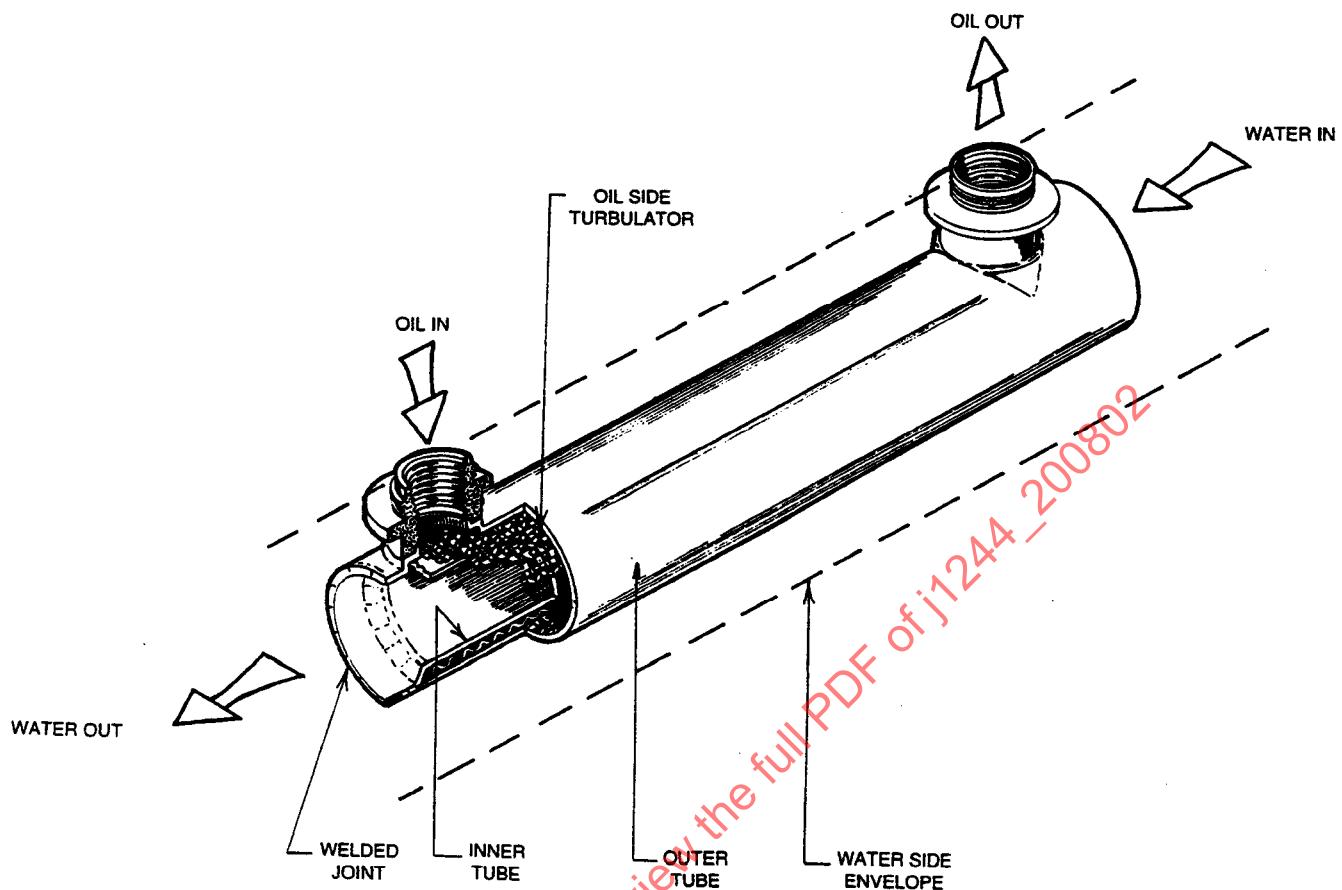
CONCENTRIC TUBE OIL TO WATER COOLER
